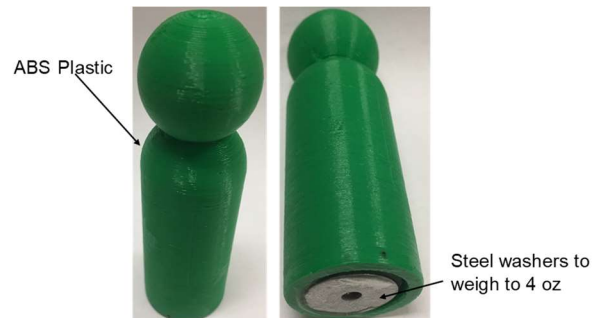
Prototype passengers. Luggage blocks were manufactured using the same techniques.
